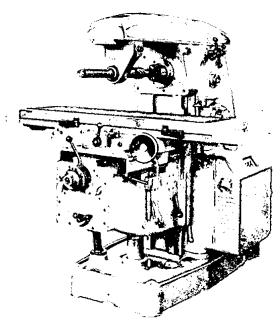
Hungary: Milling Machine (Universal, Horizontal, Knee Type)
